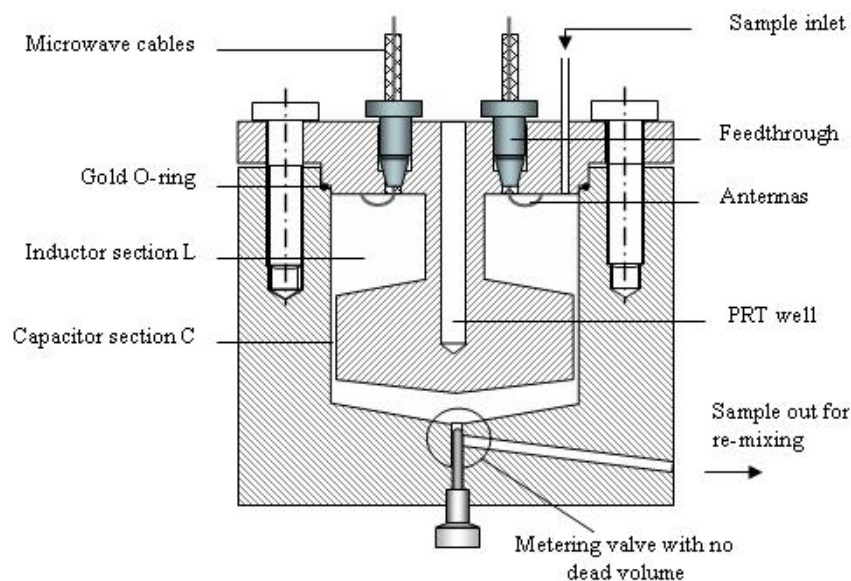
Cross-section through the microwave cavity resonator machined from type 316 stainless steel in two parts that were aligned at an interlocking step and sealed with an Au o-ring.
